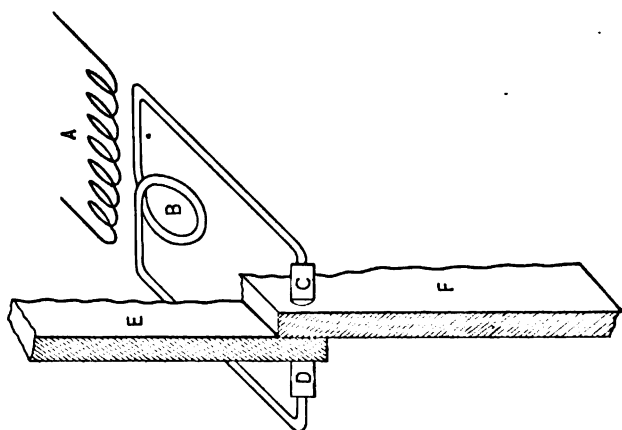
WIRING DIAGRAM OF PORTABLE SPOT WELDER WITH 27-INCH GAP.
